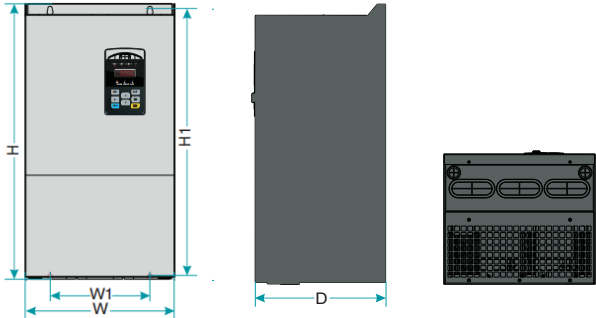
55~110KW AC drive installation dimensions and installation size
